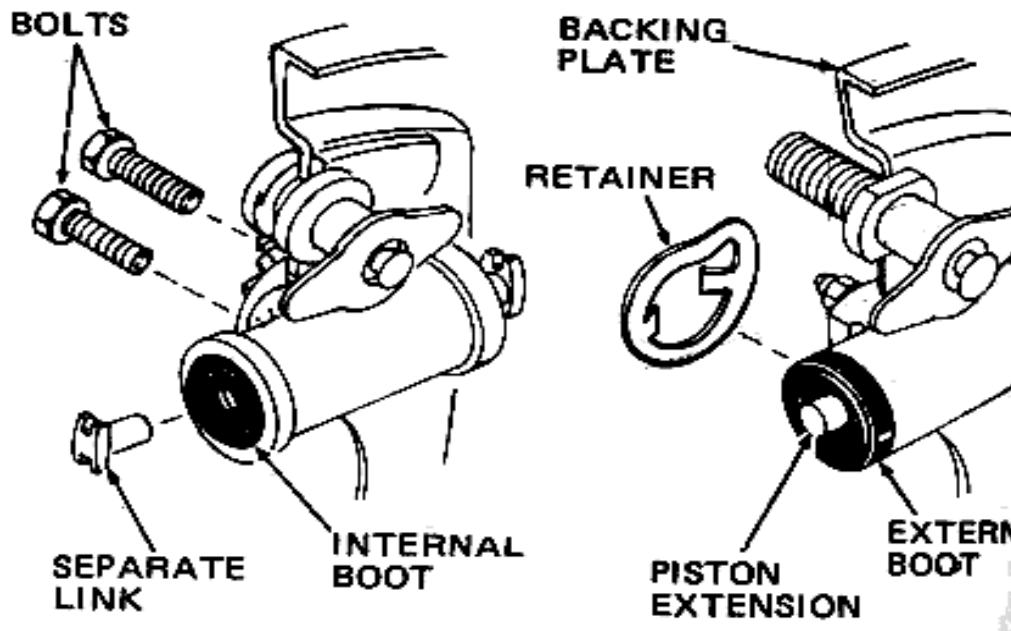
Two method of attaching the wheel cylinder to the backing plate.
